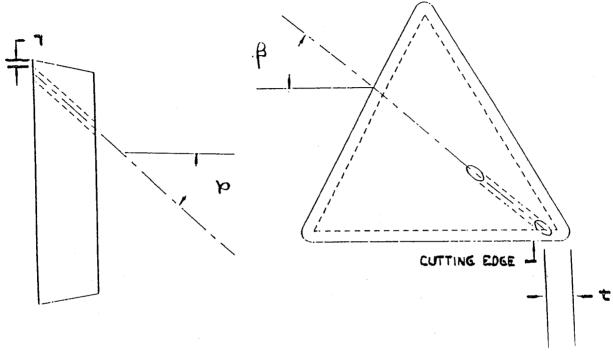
Schematic of the modified triangular carbide cutter. α is elevation angle; B is asimuth angle; T is tool nose offset; L is cutting edge offset.
